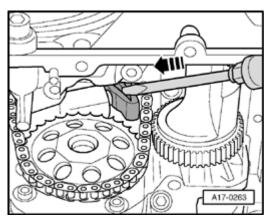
Pressing Piston Of Chain Tensioner Back Using Screwdriver Courtesy of VOLKSWAGEN UNITED STATES, INC.
